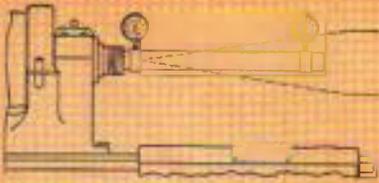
Testing Alignment of Headstock Spindle with Bed.
